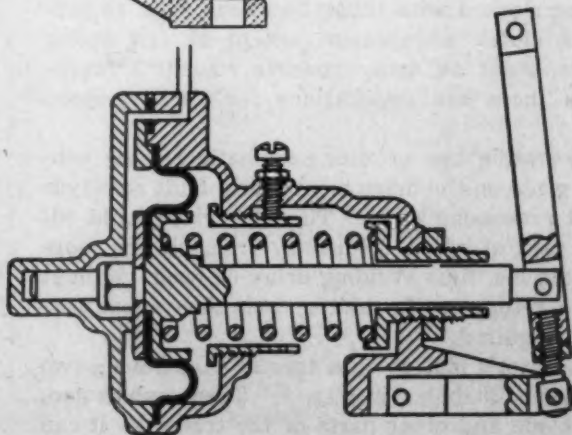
Right—Simplest type of throttle actuator of the diaphragm and spring design
